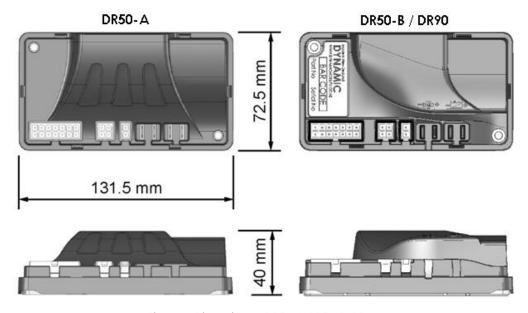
Dimensions — DR50-A, DR50-B, DR90
